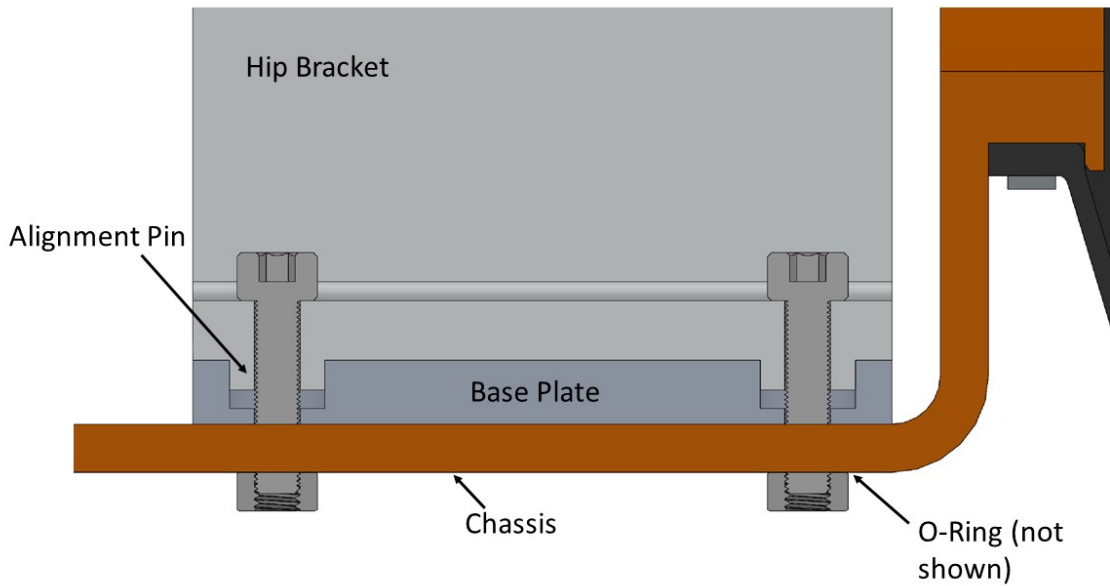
Section view of hip bracket alignment pins and fastening to chassis
